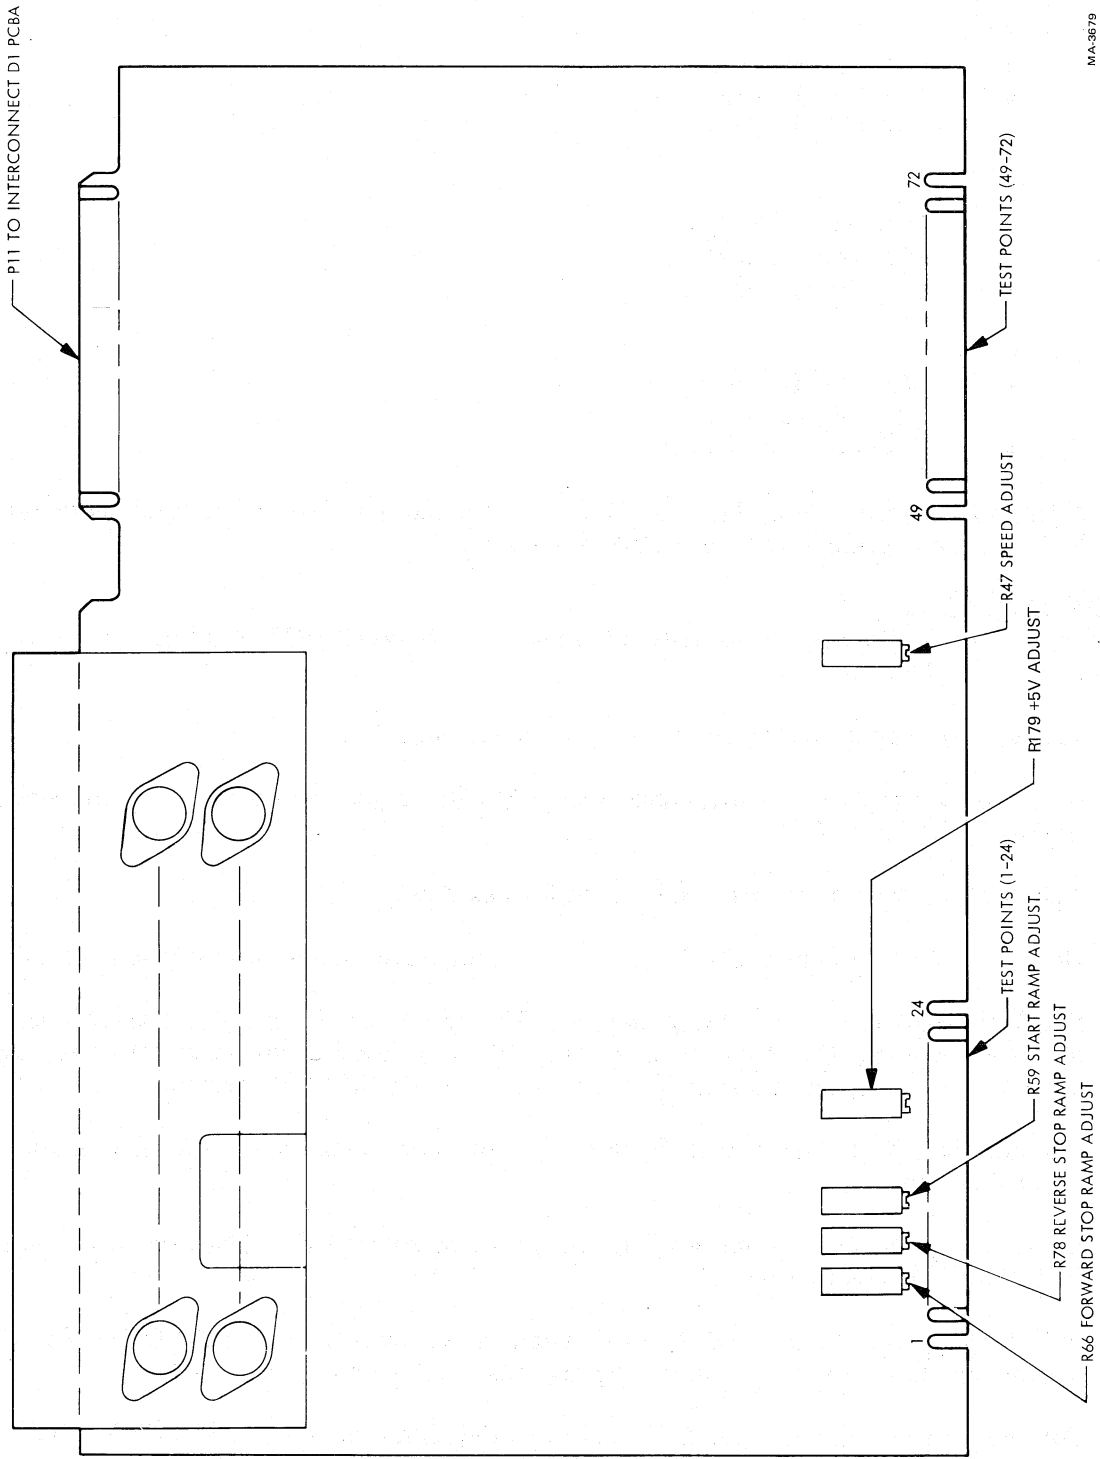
Capstan/Regulator PCBA Adjustments and Test Points
